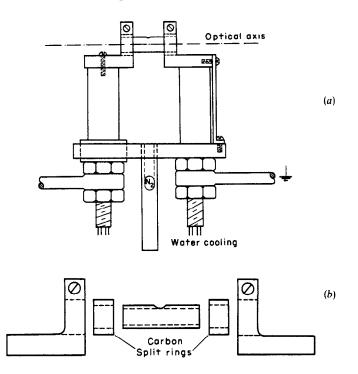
(a) Graphite-tube furnace assembly. (b) Detail of construction of graphite tube and holders.
